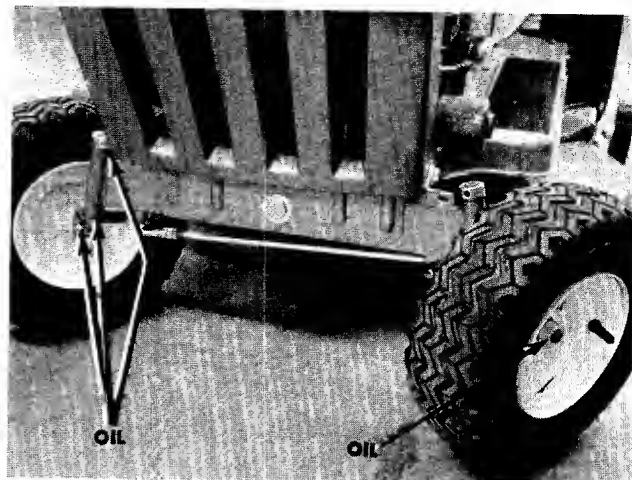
WHEEL AND SPINDLE BEARINGS
